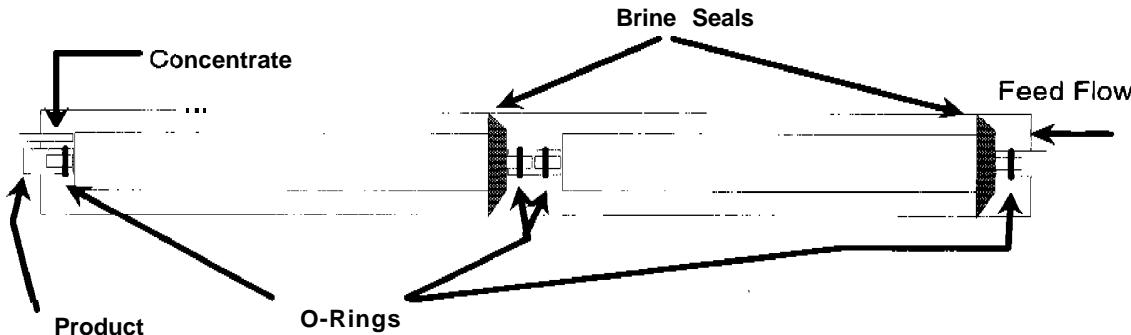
Location of o-rings and brine Seals in a vessel loaded with two spiral wound elements.
